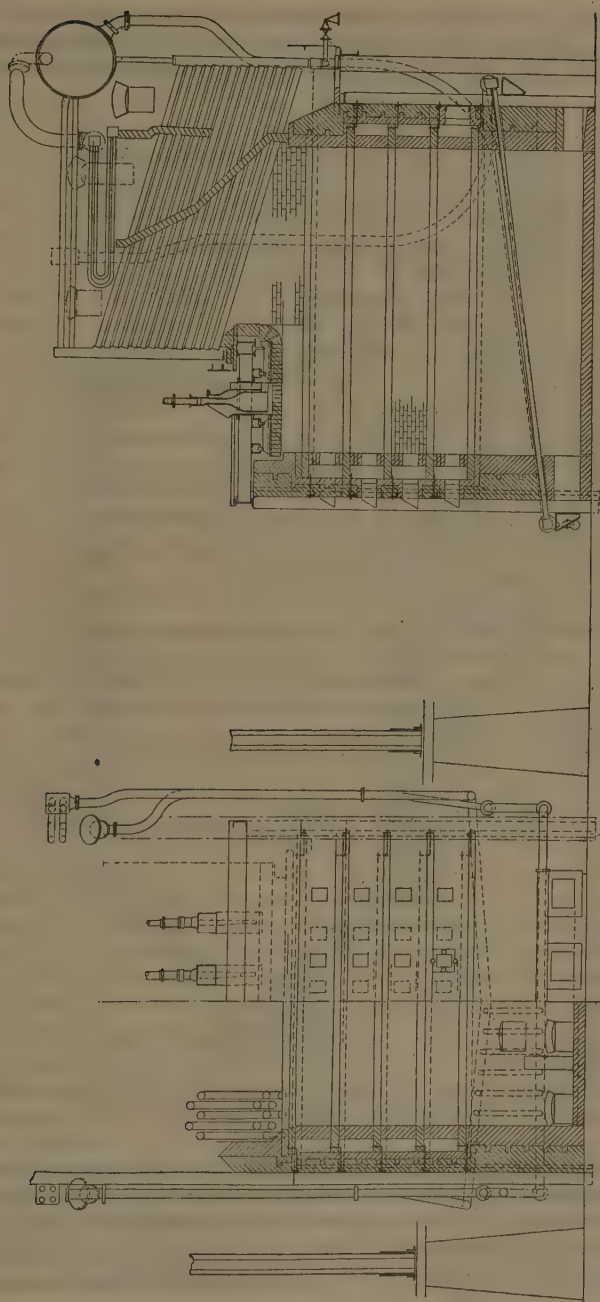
BARCOCK & WILCOX CROSS-DRUM BOILER, 8220 SQ. FT. OF HEATING SURFACE. PENN SALT COMPANY, WYANDOTTE, MICH.
